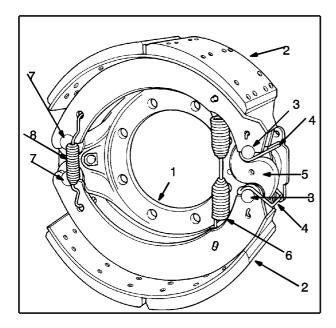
Rockwell "Q" Series Brake With Spider and Removable Anchor Pins
